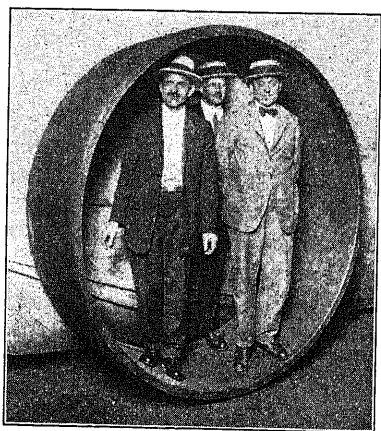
ROTOR RETAINING RING FOR 62,500-KV-A., 1200-REV. PER MIN. GENERATOR, READY FOR EXPANDING BY HEAT AND SHRINKING ON
